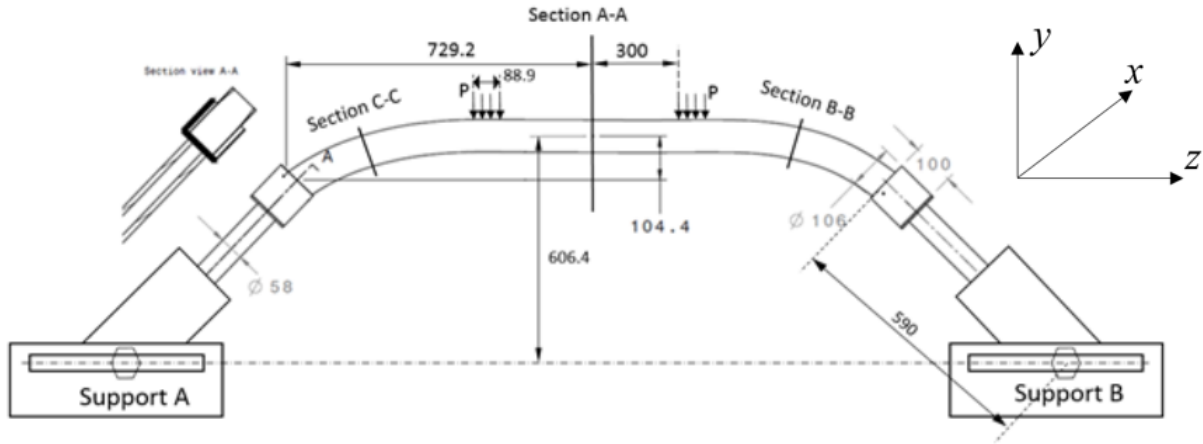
Composite tube and the test setup dimension, (dimensions are in millimeter).
